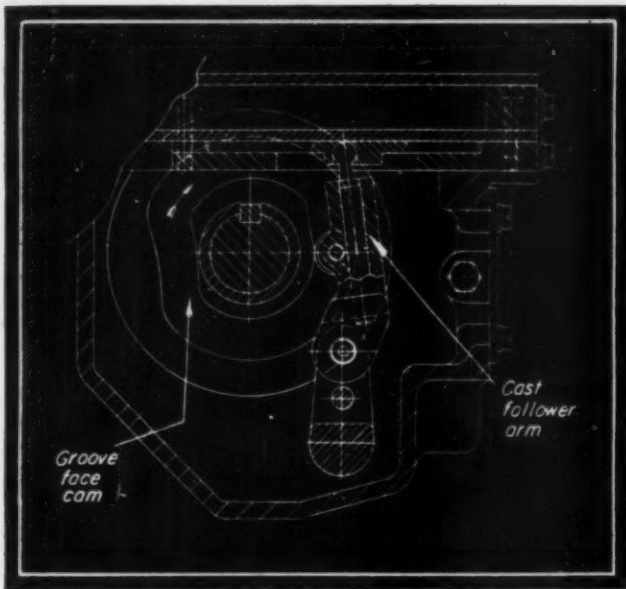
Original laboratory tucking unit with grooved face cam and cast follower arm
